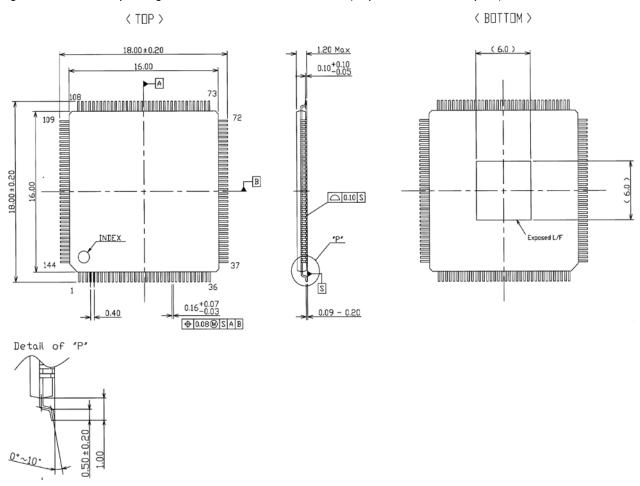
KL5BPLC200WMP package outline (Exposed TQFP-144 pins)
